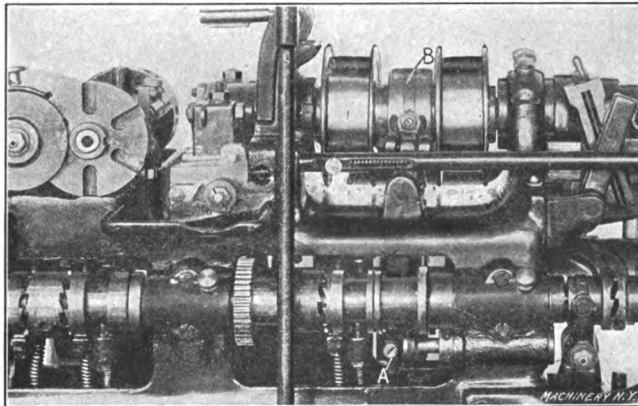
Rear View of No. 00 Brown & Sharpe Automatic Screw Machine showing Reversing Mechanism
